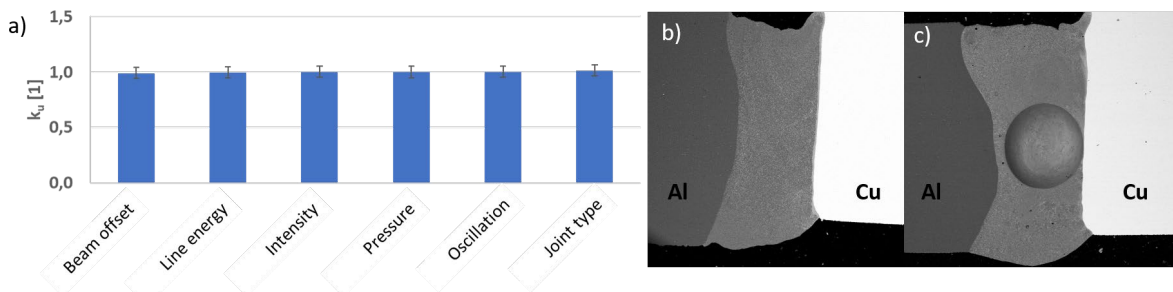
(a) Contact value of all varied parameters (b) good weld seam quality (c) poor weld seam with pores
